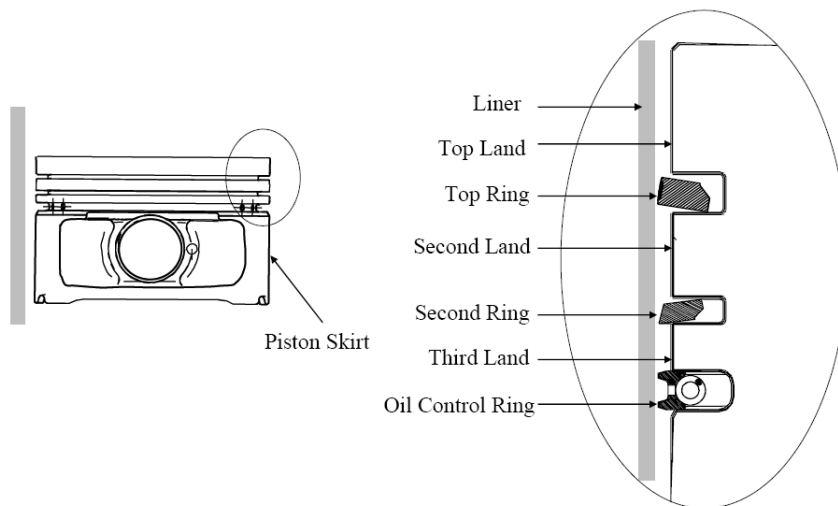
Schematic of power cylinder with piston ringpack detail, from [22].
